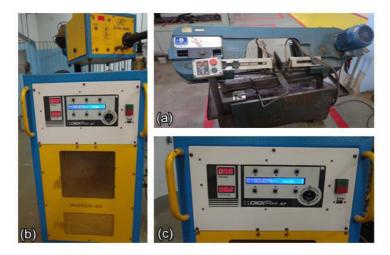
(a) Process of cutting welding specimens. (b) Multi-process machine used during the welding process. (c) IMC Inversal 600 Human-Machine Interface.
